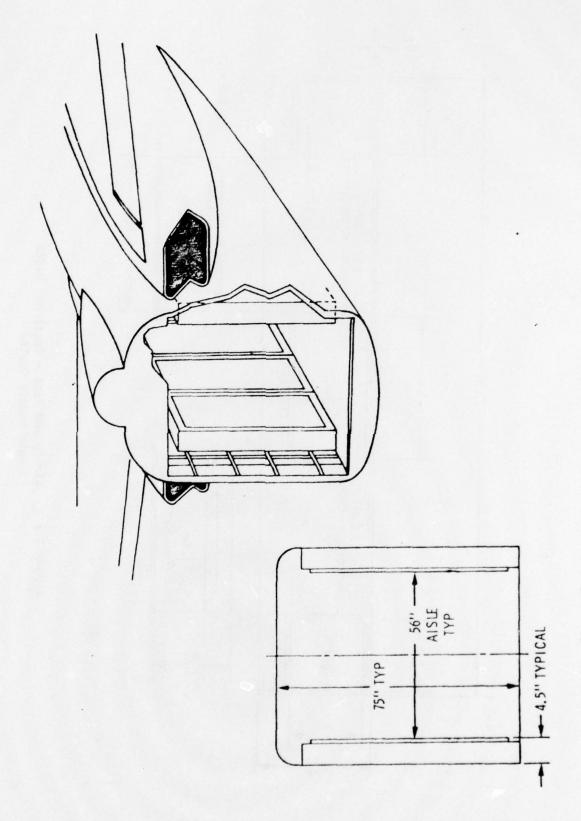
Typical Fore and Aft Racks in a Rectangular Fuselage
